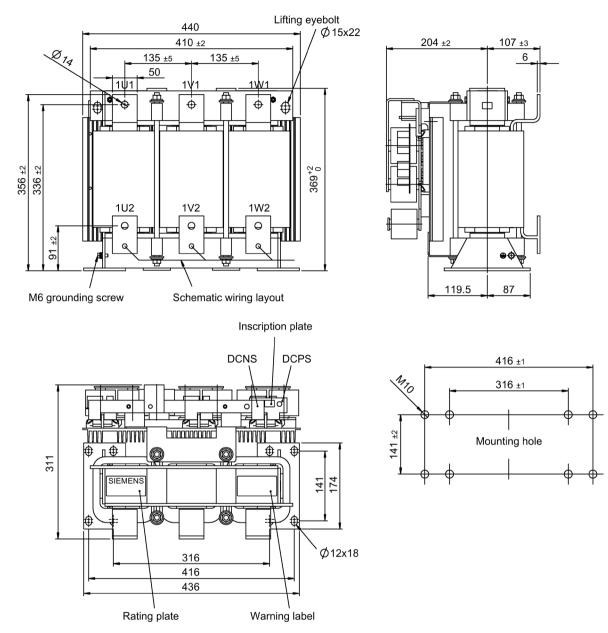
Dimension drawing for dV/dt filter compact plus voltage peak limiter, type 3
